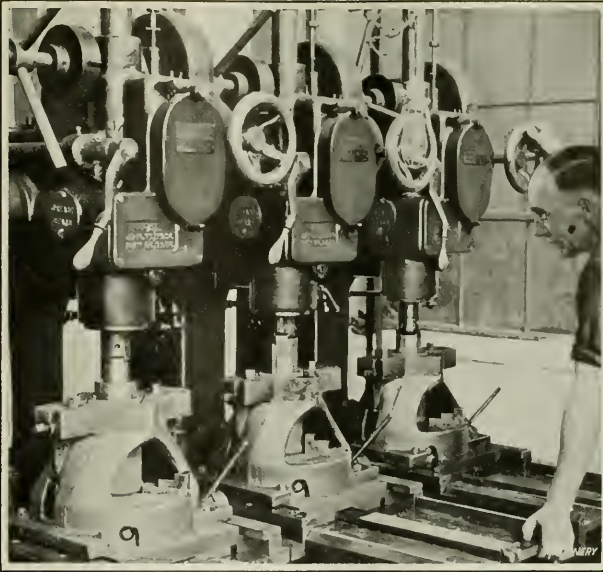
Three-spindle Heavy-duty Drilling Machine with Track for moving the Jigs from Spindle to Spindle
